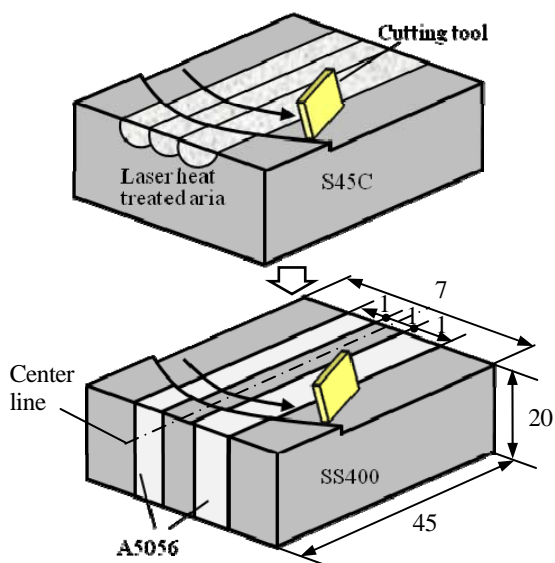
Cutting model simulating cutting of laser heat treated workpiece
